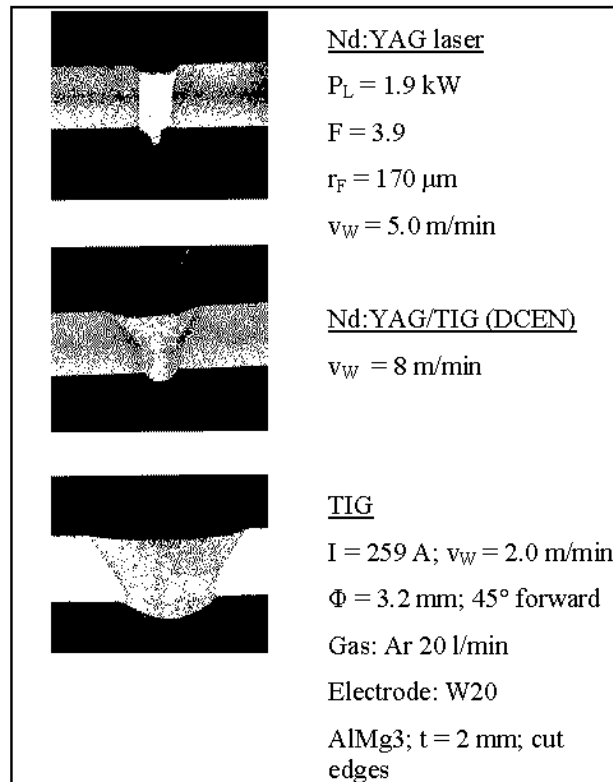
Welding of aluminium by means of different processes [1, 2]
